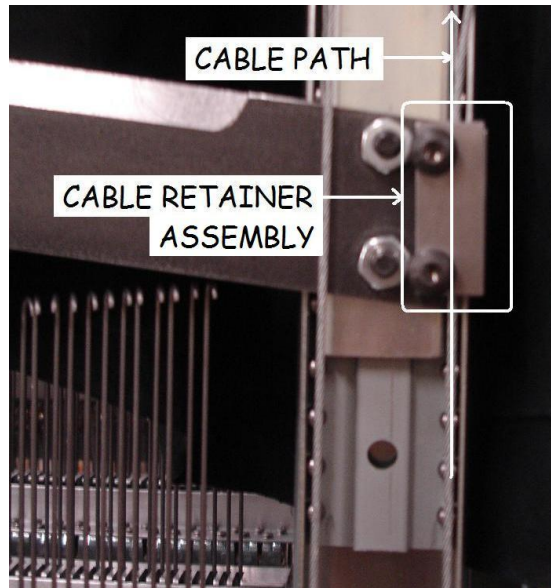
Slide Bar & Retainer Assembly (right side)
